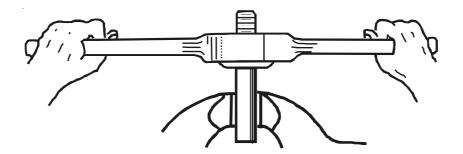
Threading by a die 1. Work 2. Die stock 3. Vise
